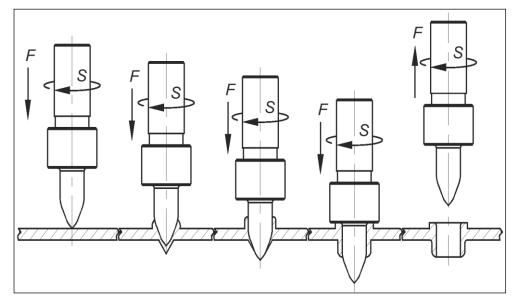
Friction drilling steps: a - initial contact; b- tool-tip penetration to the material; c - material flow; d bush forming; e - tool withdrawal (source: Article of Prof. povilas krasauskas)
